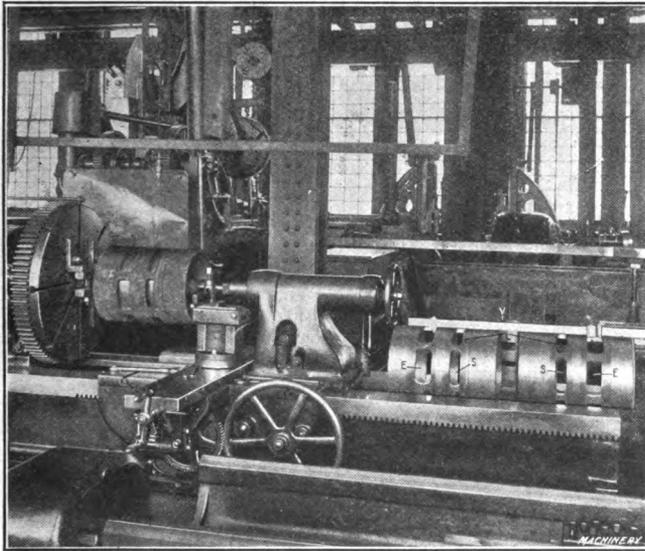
Method of Turning Valve Bushings and Preliminary Test to determine Location of Steam Ports
